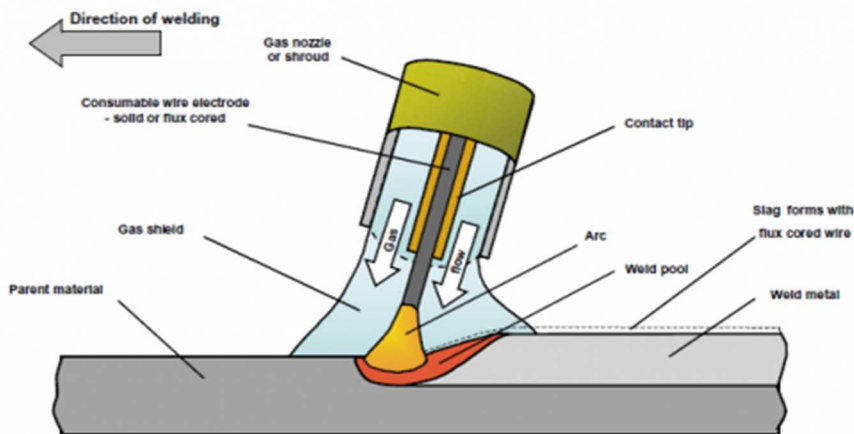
Metal-active gas welding (MAG) [106].
